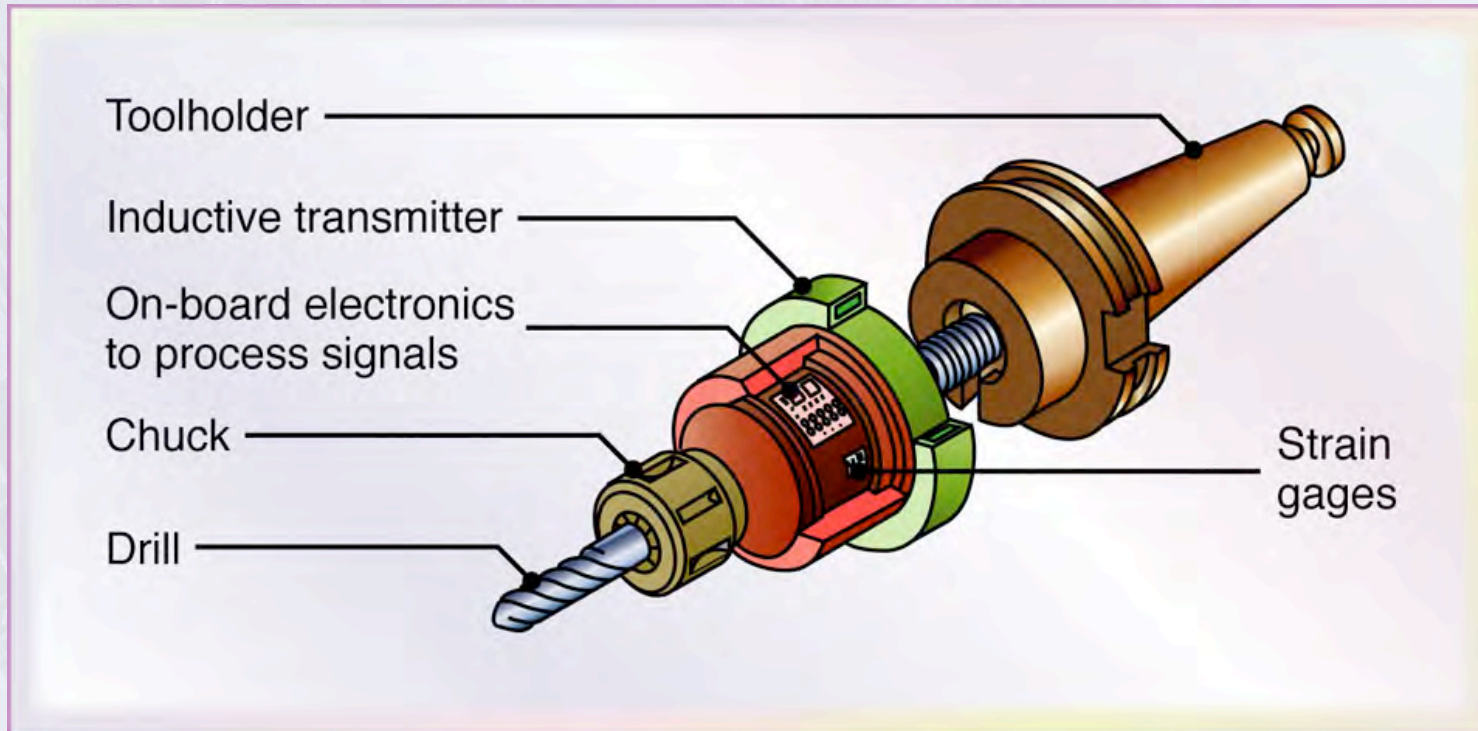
A toolholder equipped with thrust-force and torque sensors (smart toolholder), capable of continuously monitoring the cutting operation. Such toolholders are necessary for the adaptive control of manufacturing operations. *Source:* Courtesy of Cincinnati Milacron, Inc.
